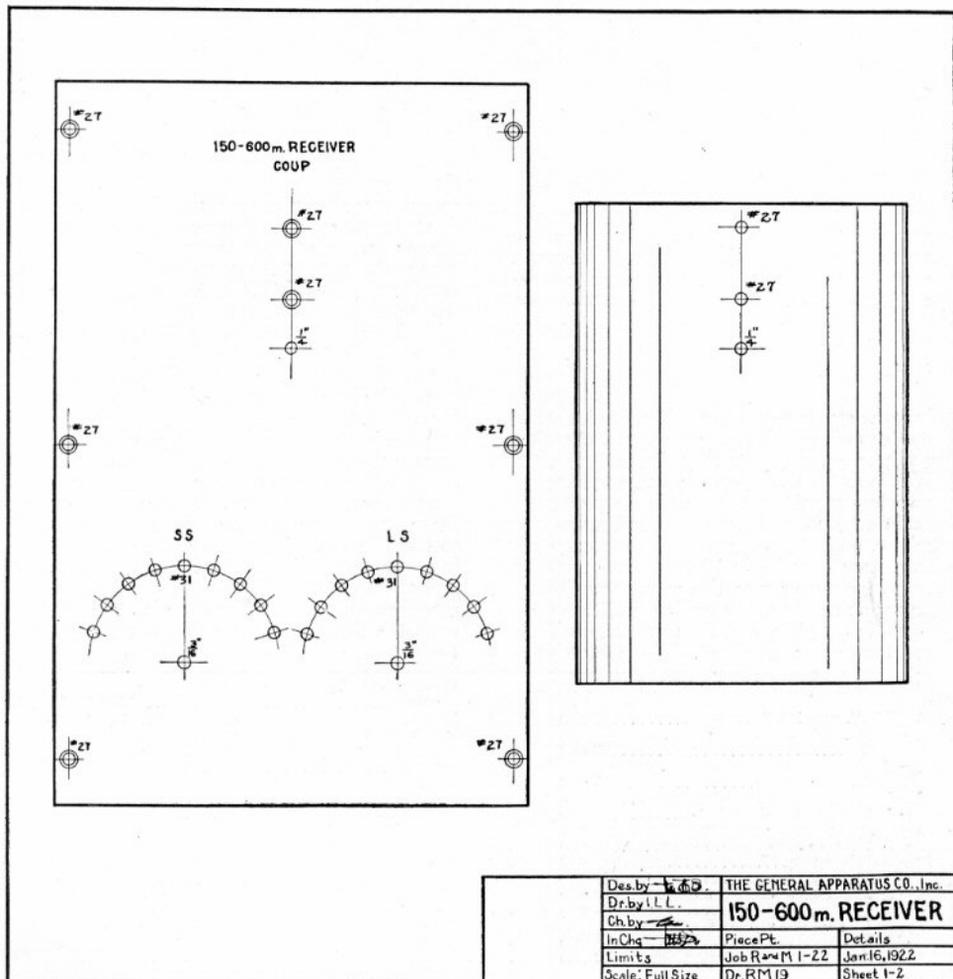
Scale drawing of panel and tube, reduced to one half size
